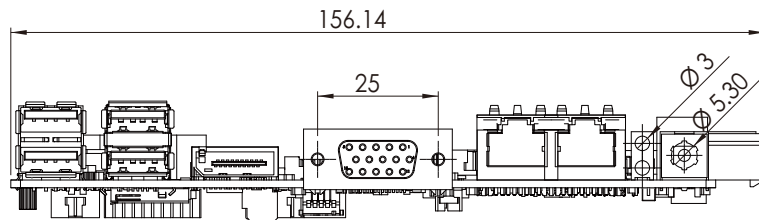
MIO-5251 Mechanical Drawing (Top Side)
